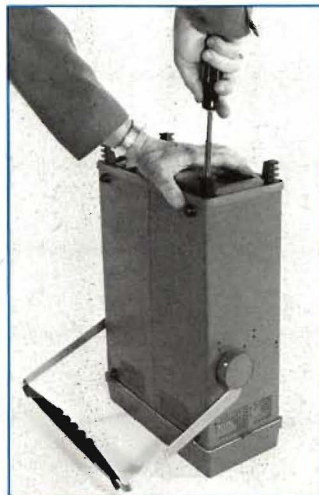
The 465 cabinet is removed by loosening six screws on the rear panel.
